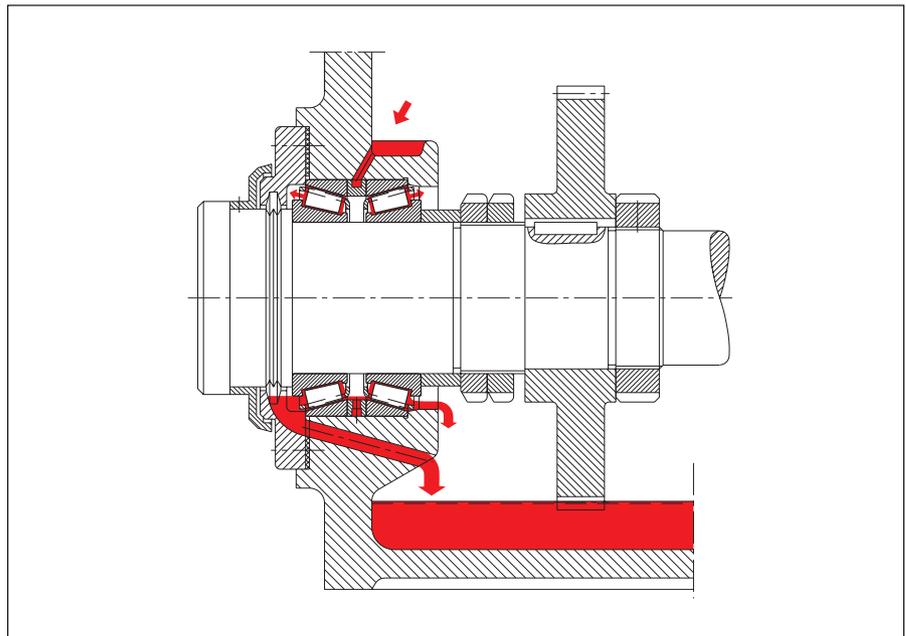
and 63: With oil jet lubrication, the oil jet is forced between cage and inner ring. Oil drain ducts prevent oil
